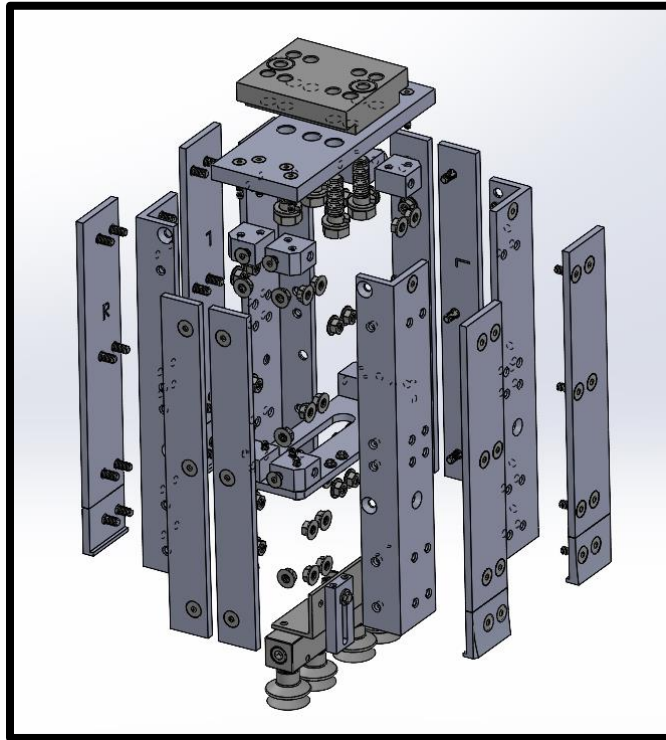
Exploded view of retail pack mandrel. This mandrel is specifically the NM 2508-2511. However, the overall assembly is similar for all 3 mandrels.
